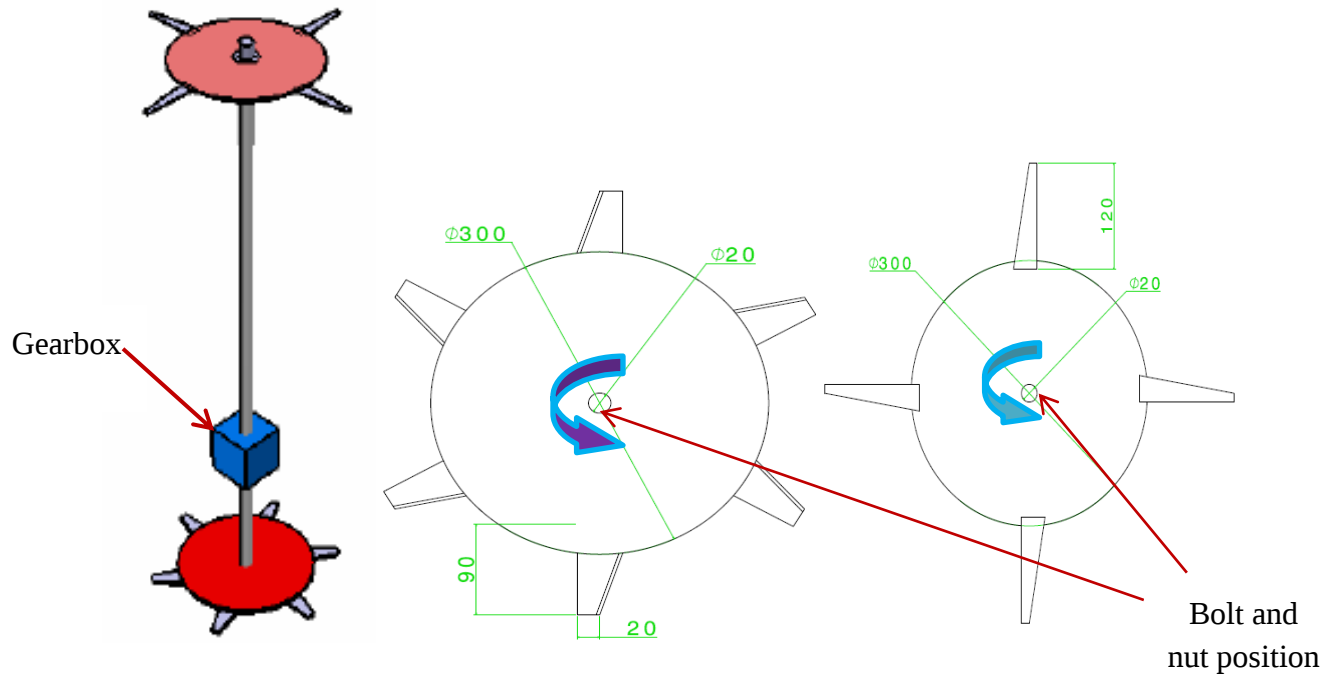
5. Revolving knife disc with a cutter for the bottom and top disc
